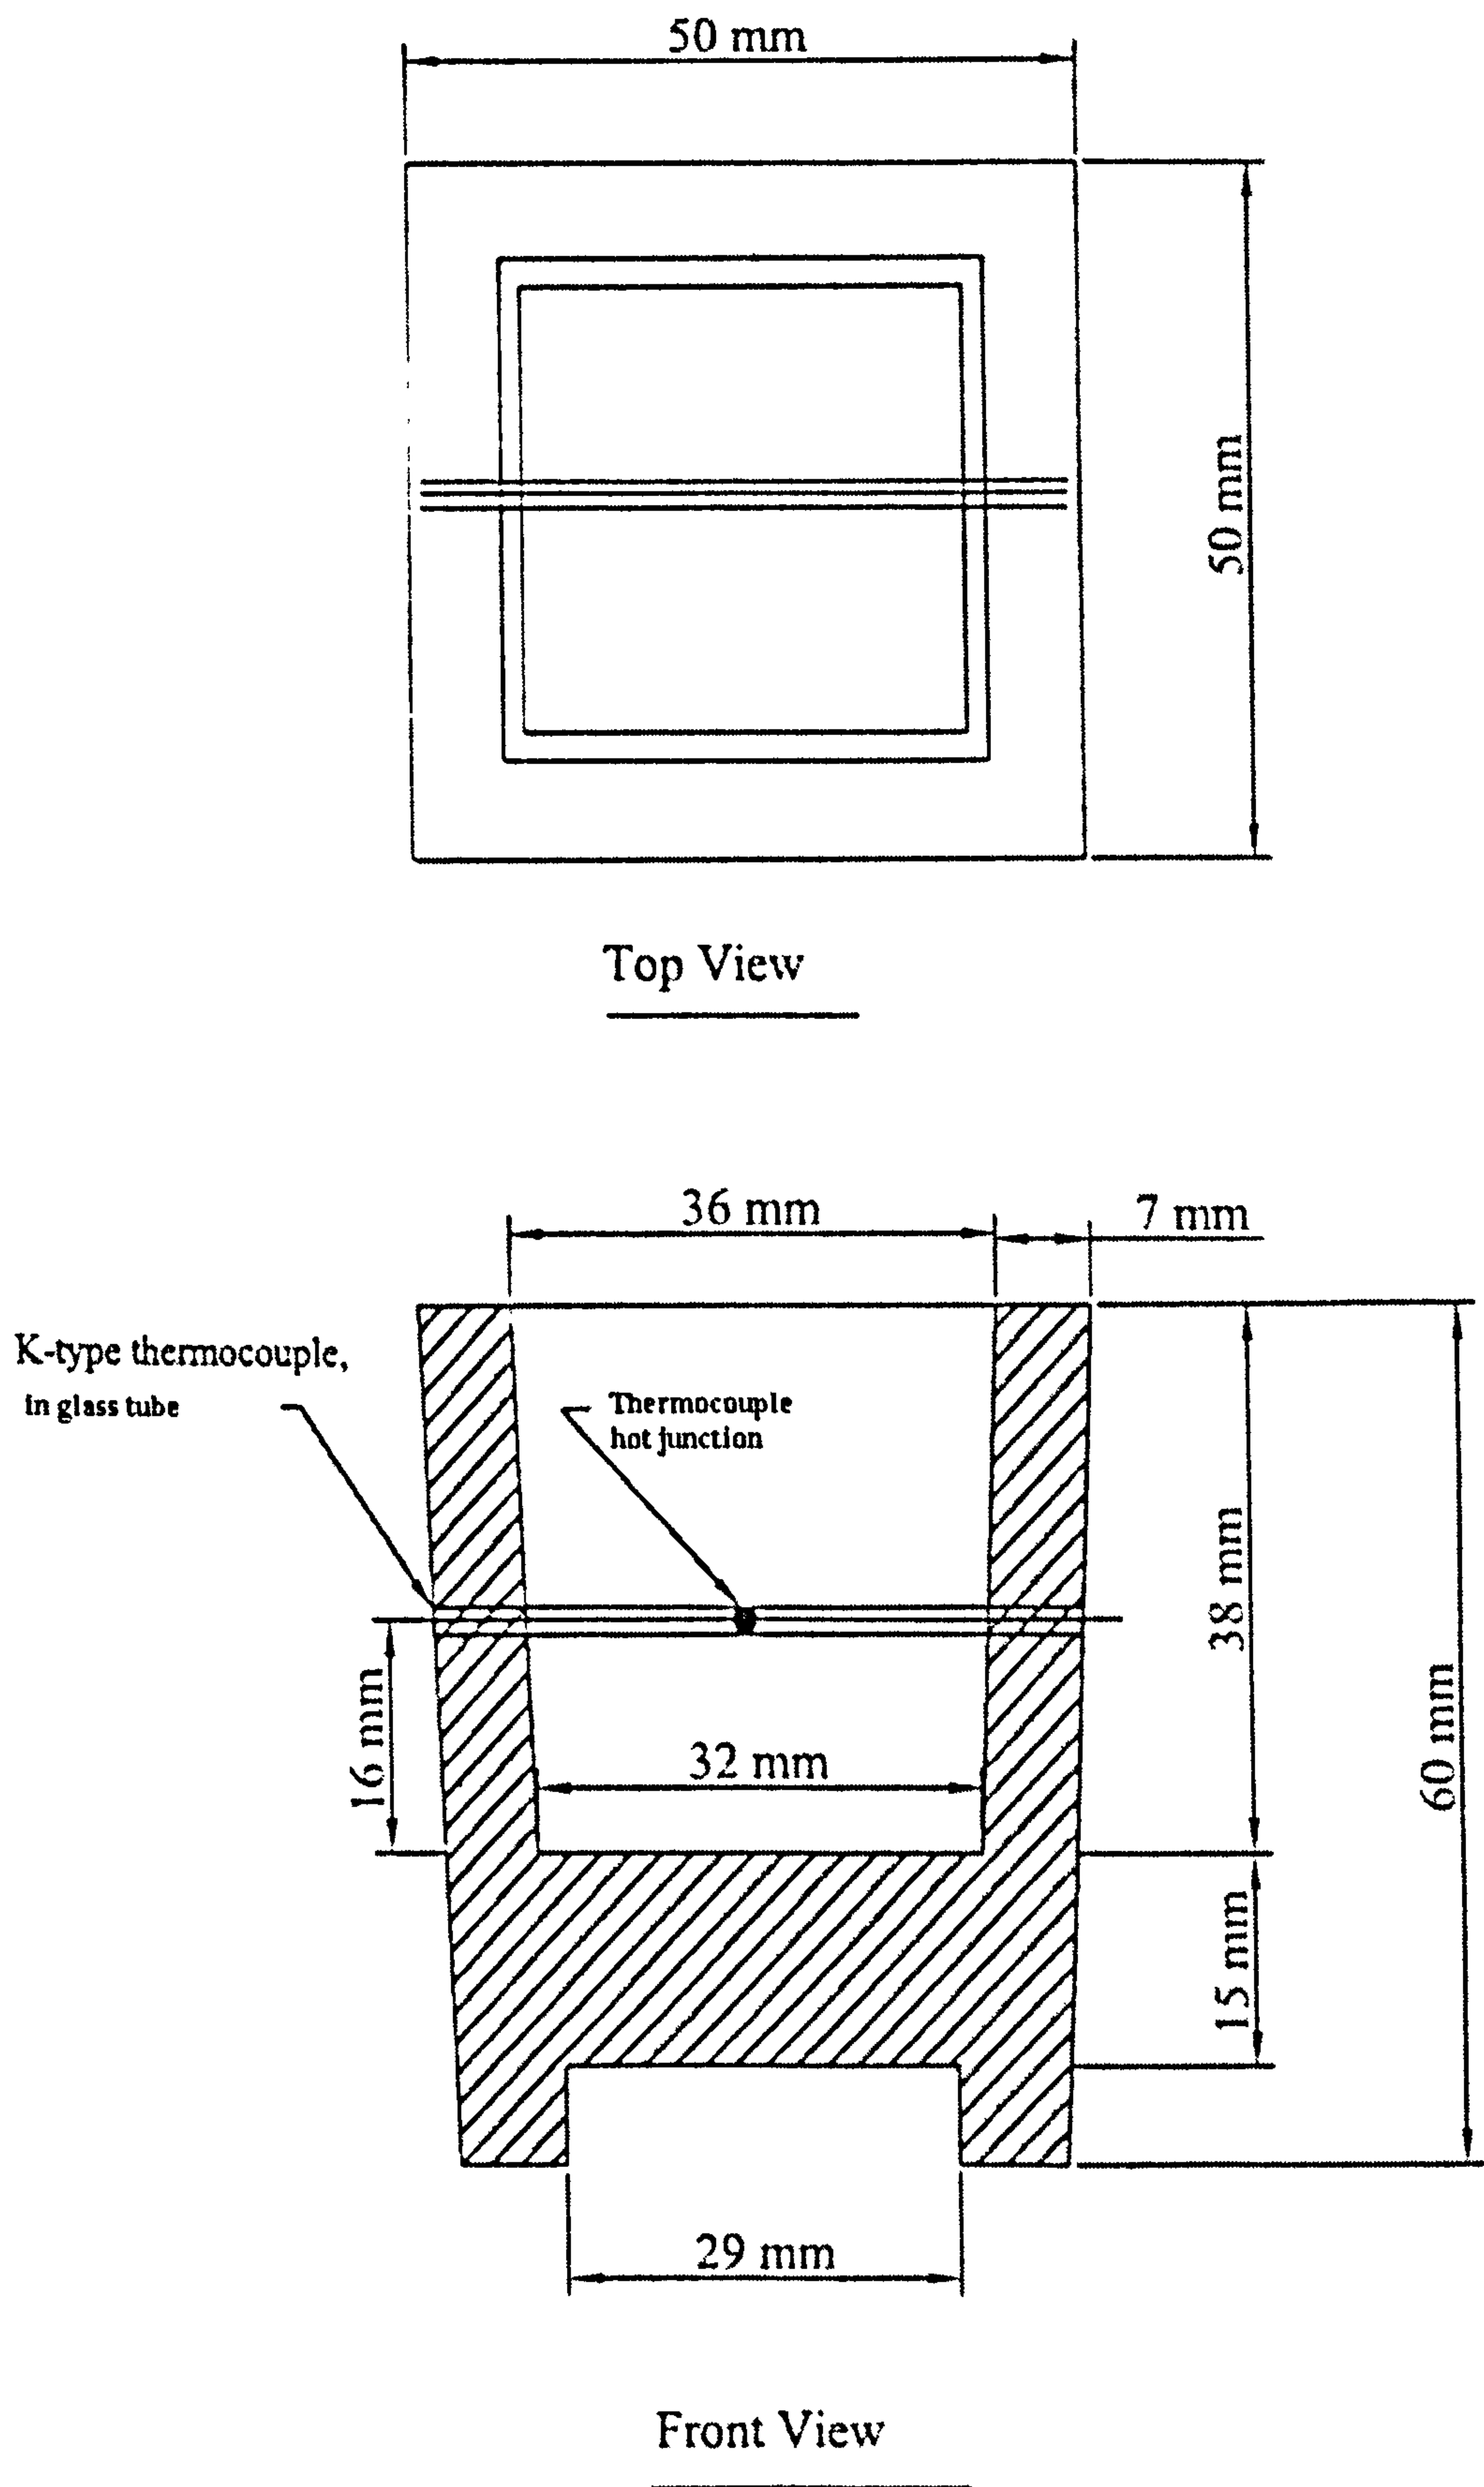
The dimensions of the Quikcup sand mould used in this study
